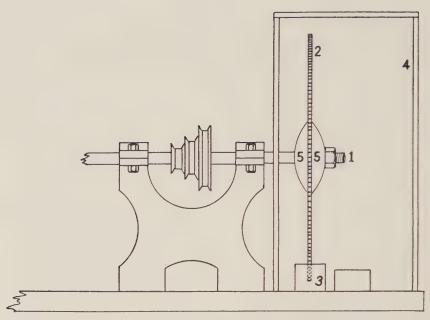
Front View of Diamond-Saw and Splash-Guard Assembly. 1, spindle of arbor; 2, 12-inch saw blade; 3, lubricating well; 4, splash guard; 5, 2-inch flanges. In this view the carriage is not shown.
